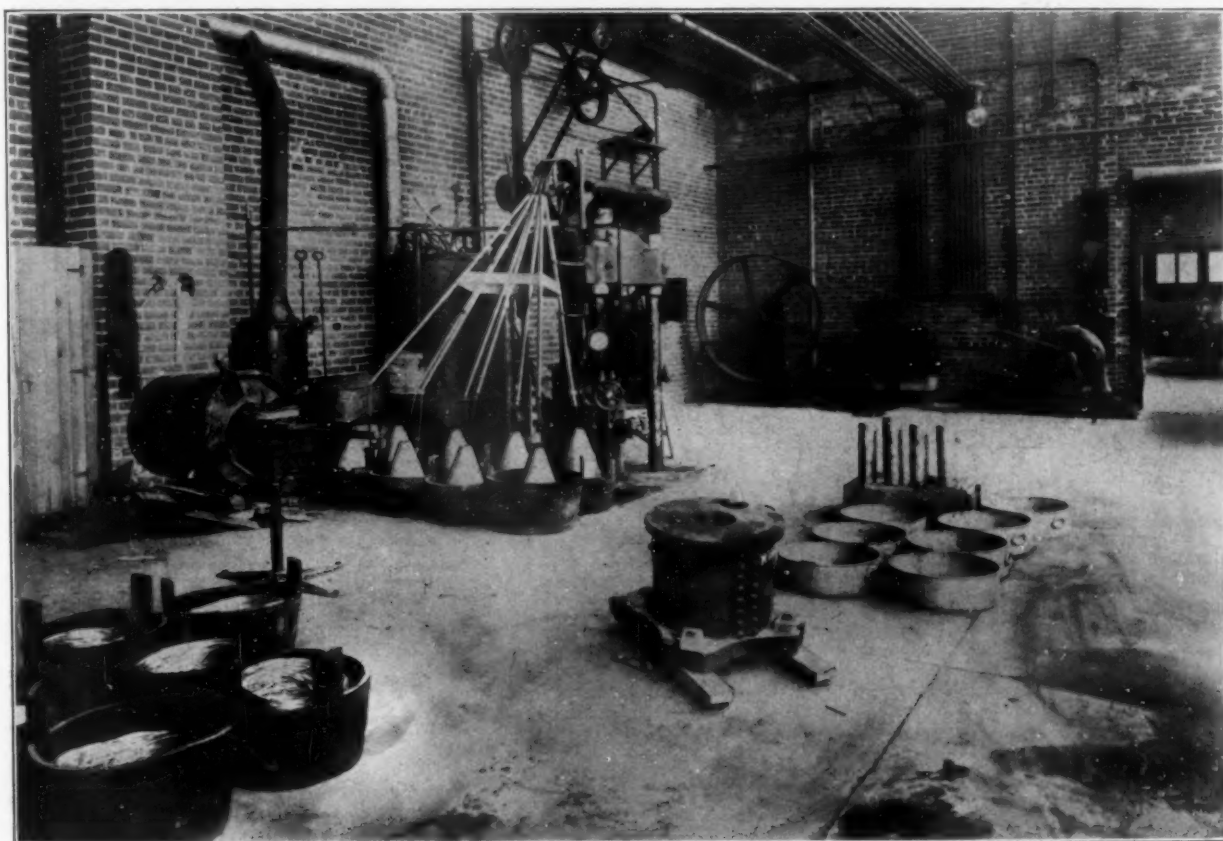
A VIEW OF THE SOLDER WIRE MAKING MACHINE SHOWING HYDRAULIC PUMP AND MOTOR.
